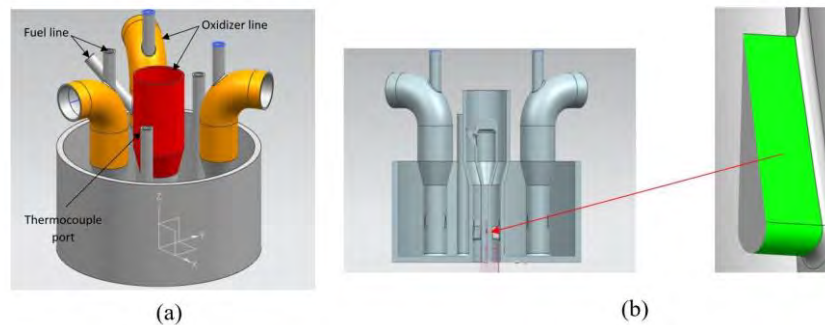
(a) Design of the AM manufactured injector (b) Air foil shaped support for fuel line inside the oxidizer line
